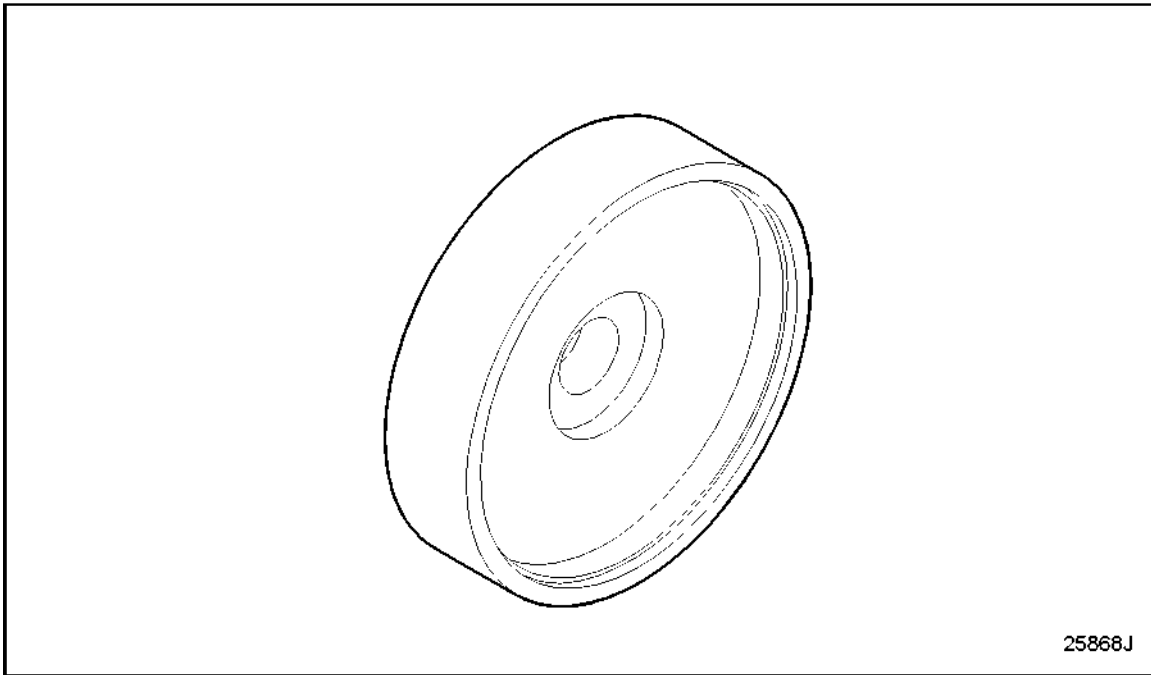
Rear Seal Sleeve Installer (6V53),J 21277
